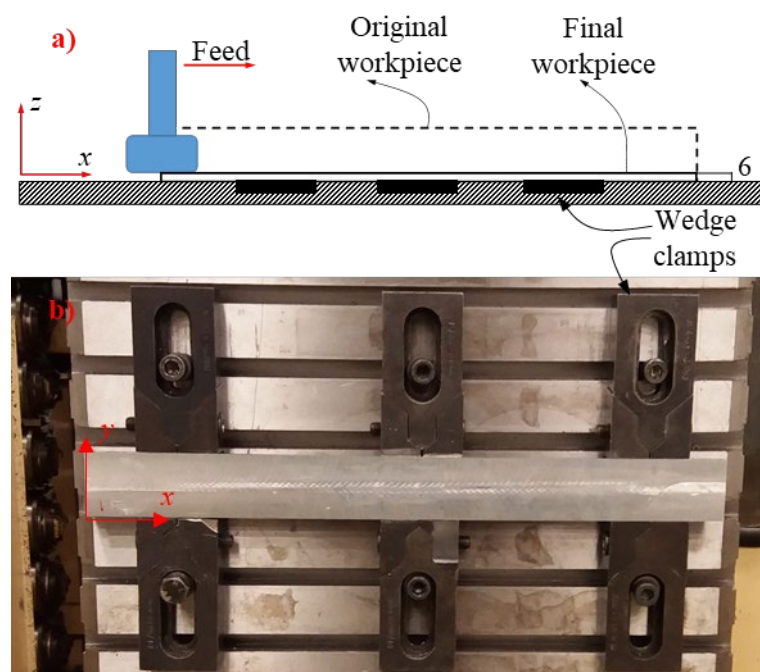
a) Scheme of the face milling experiments and b) clamping system
